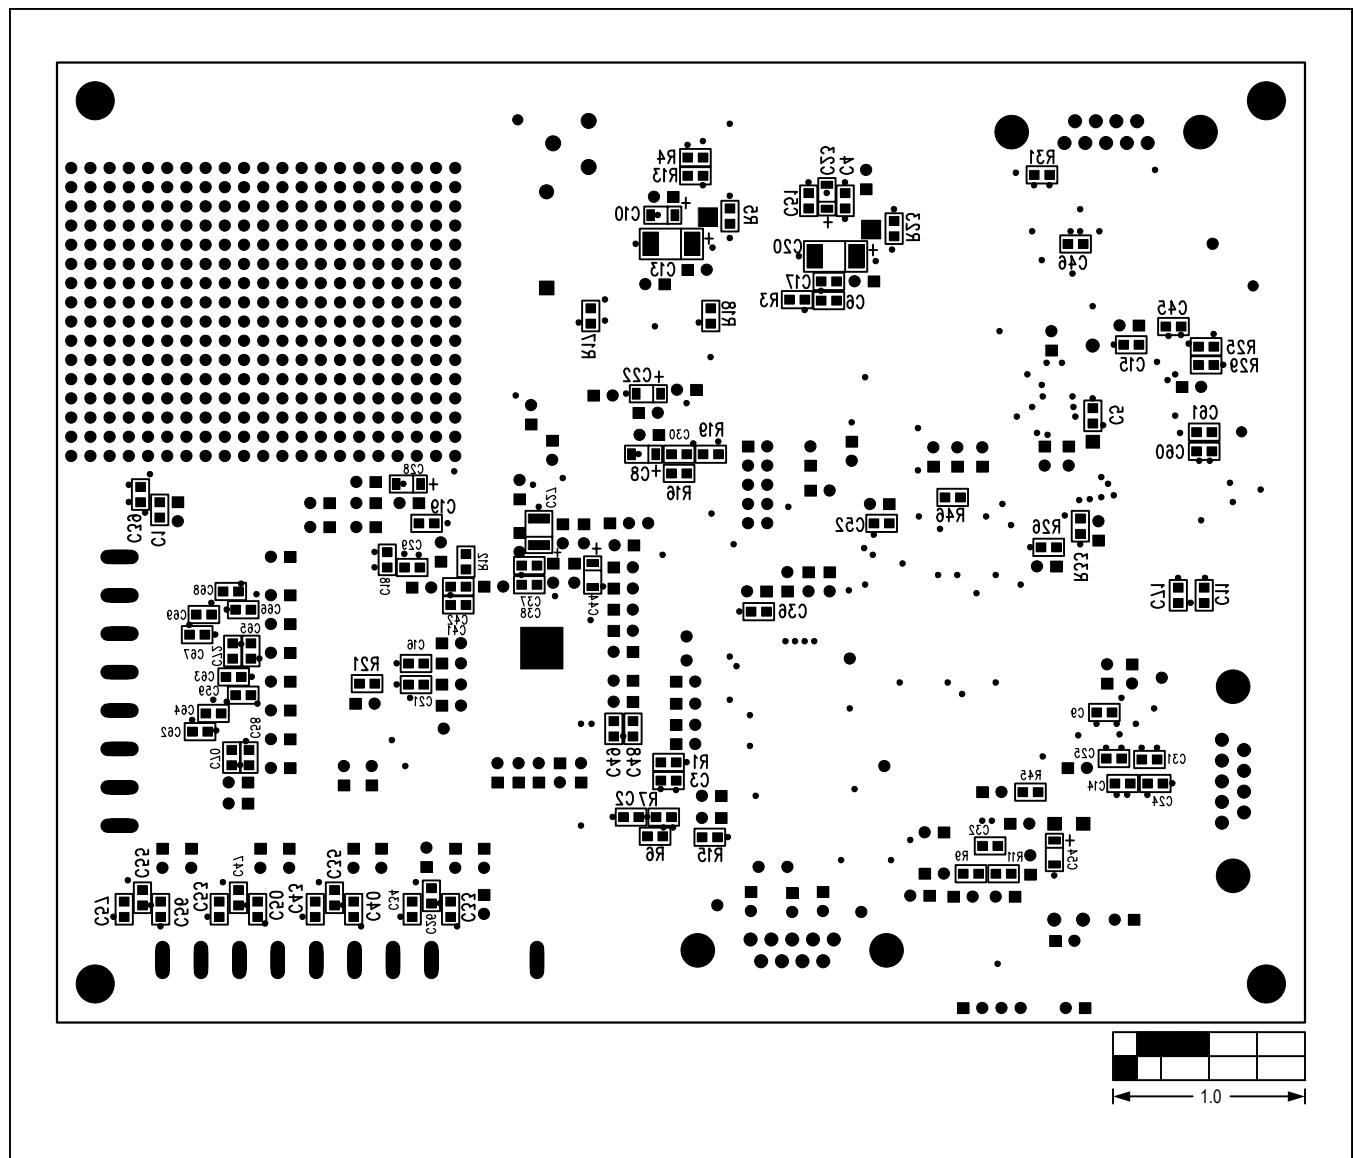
MAXQ7665 EV Kit PCB—Bottom Silkscreen
